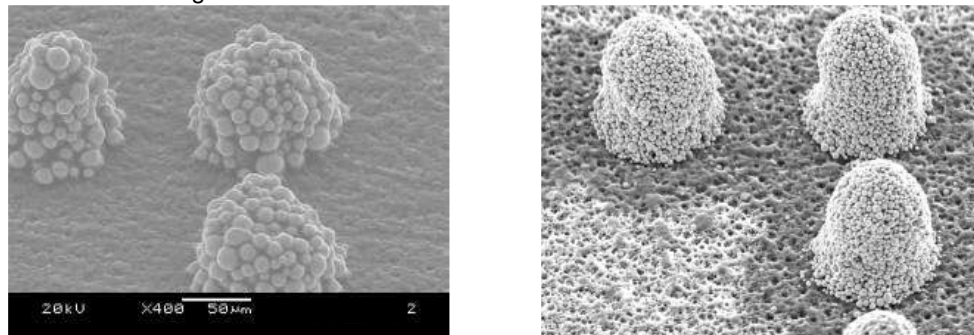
, solder deposits from 70µm diameter apertures, a) type-6 solder PSD paste, b) type-7 solder PSD paste
